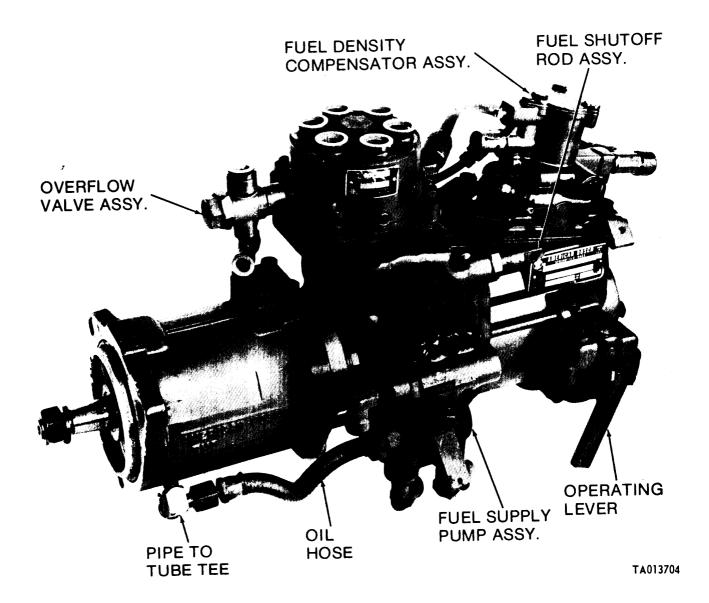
Metering and distributing fuel injection pump assembly (late code F), left front view.
